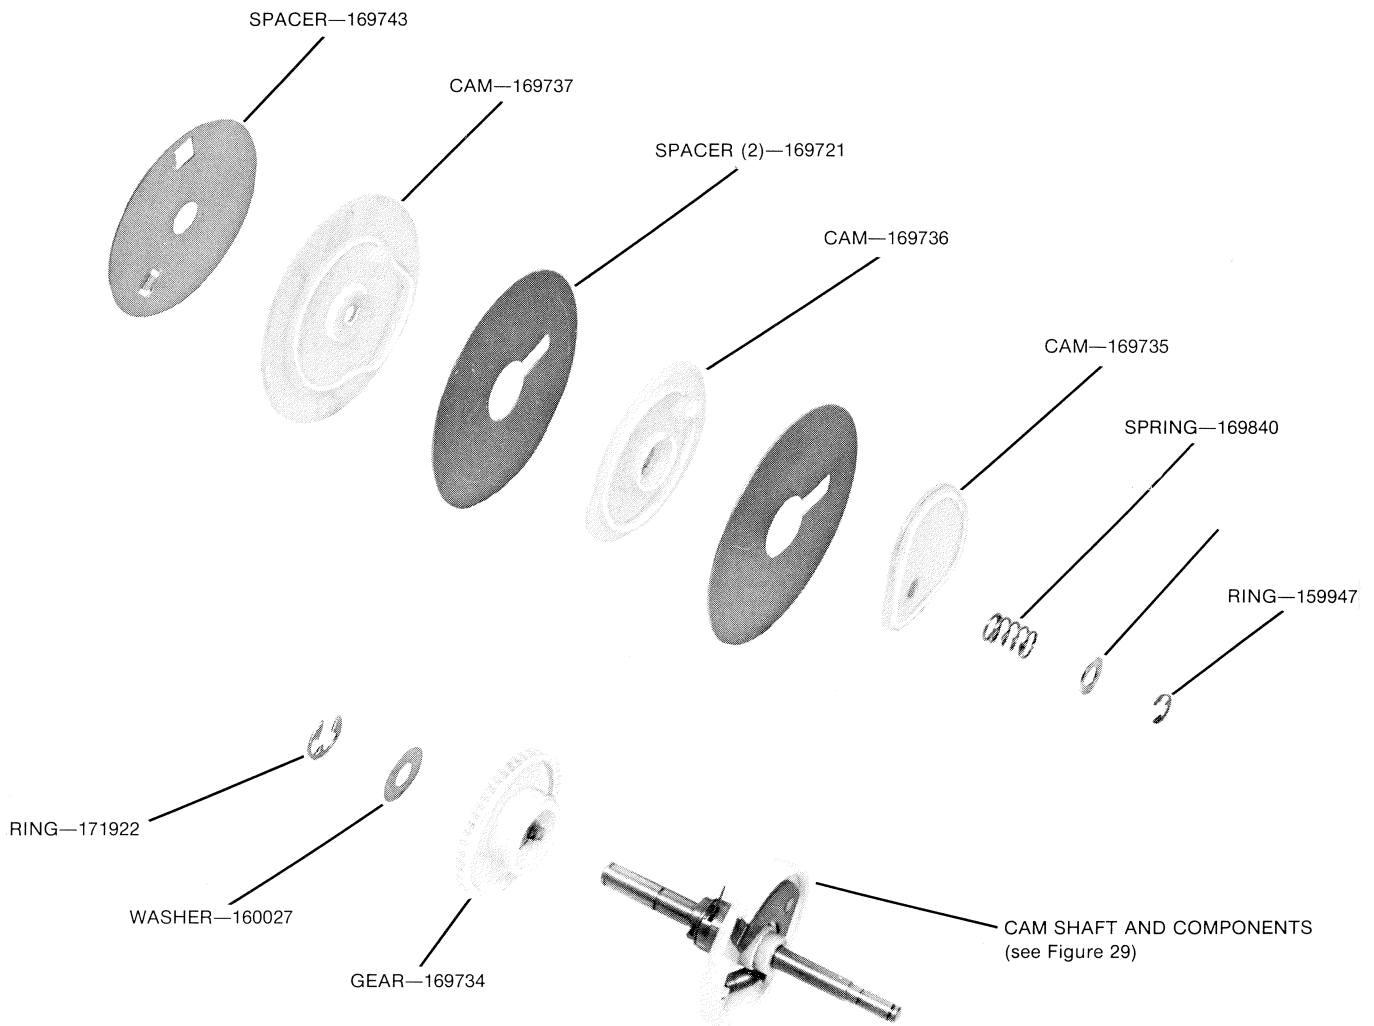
CAM SHAFT ASSEMBLY—170758
